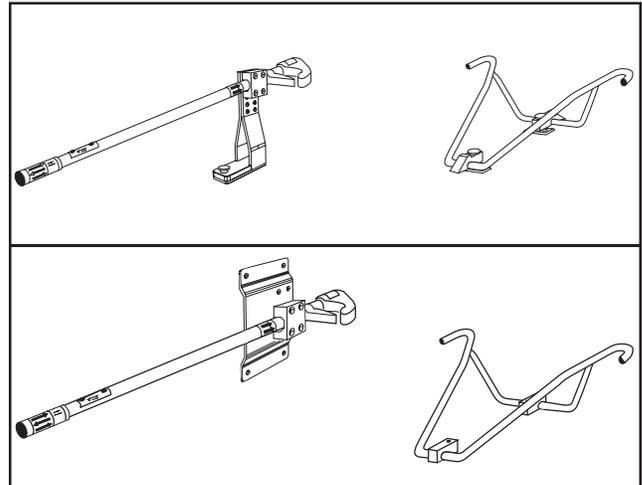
Examples of Model 175 (Antler and Rail) Fasteners
